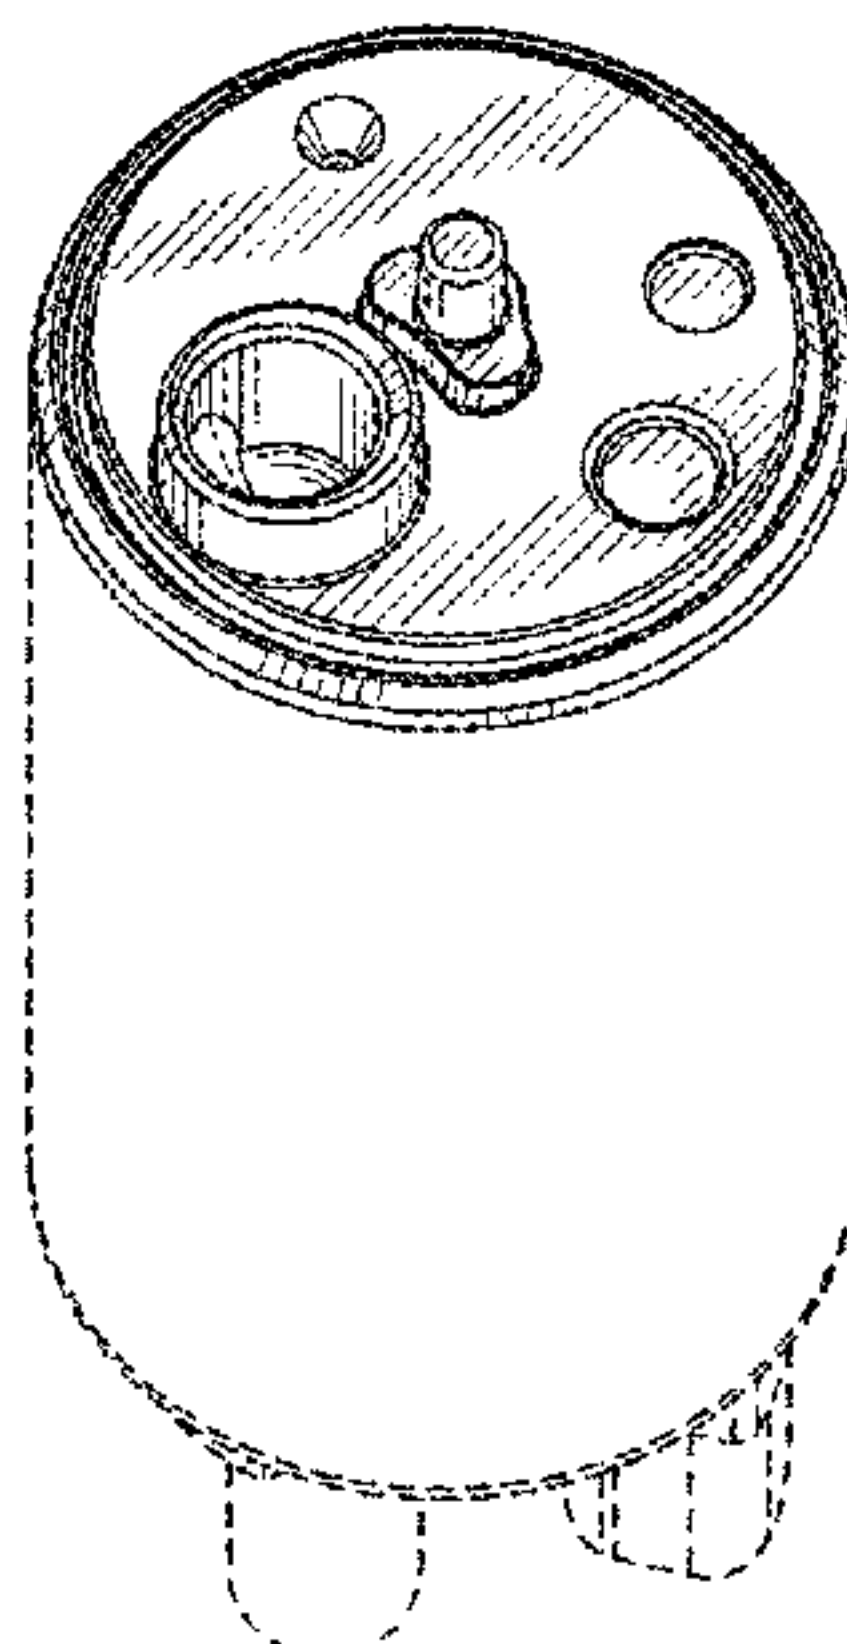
is a front view of the rotational pump shown in FIG. 9;
